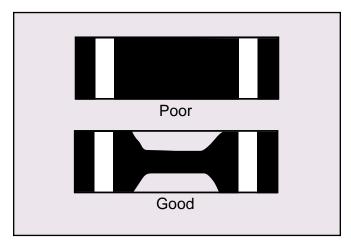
Good and Poor Coring for Thick Wall Sections
